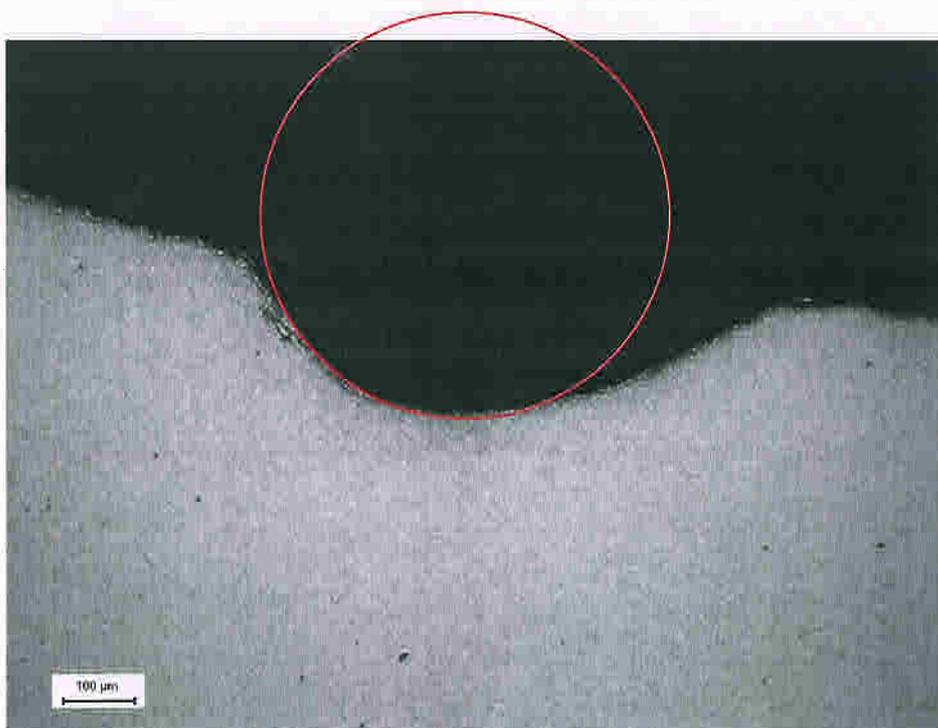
Thread bottom in the -190 screw. $R=0.28$ mm (min=0.25).
